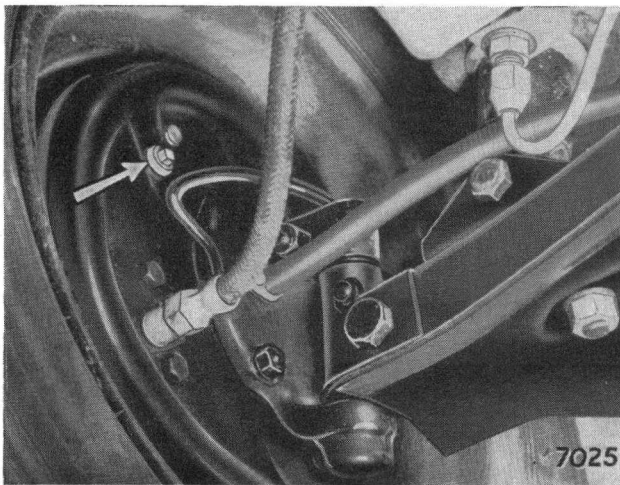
Location of one brake shoe adjuster of the front brake, the second adjuster is diametrically opposite
